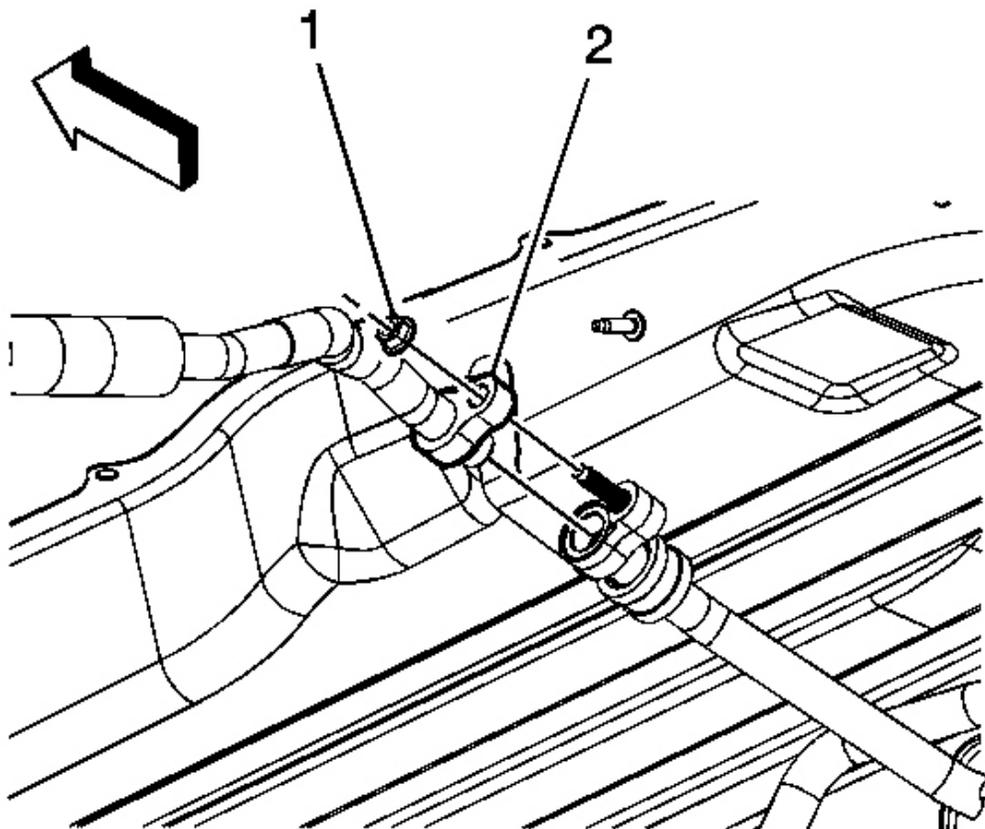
View Of Suction Hose/Pipe Nut & TXV Tube
